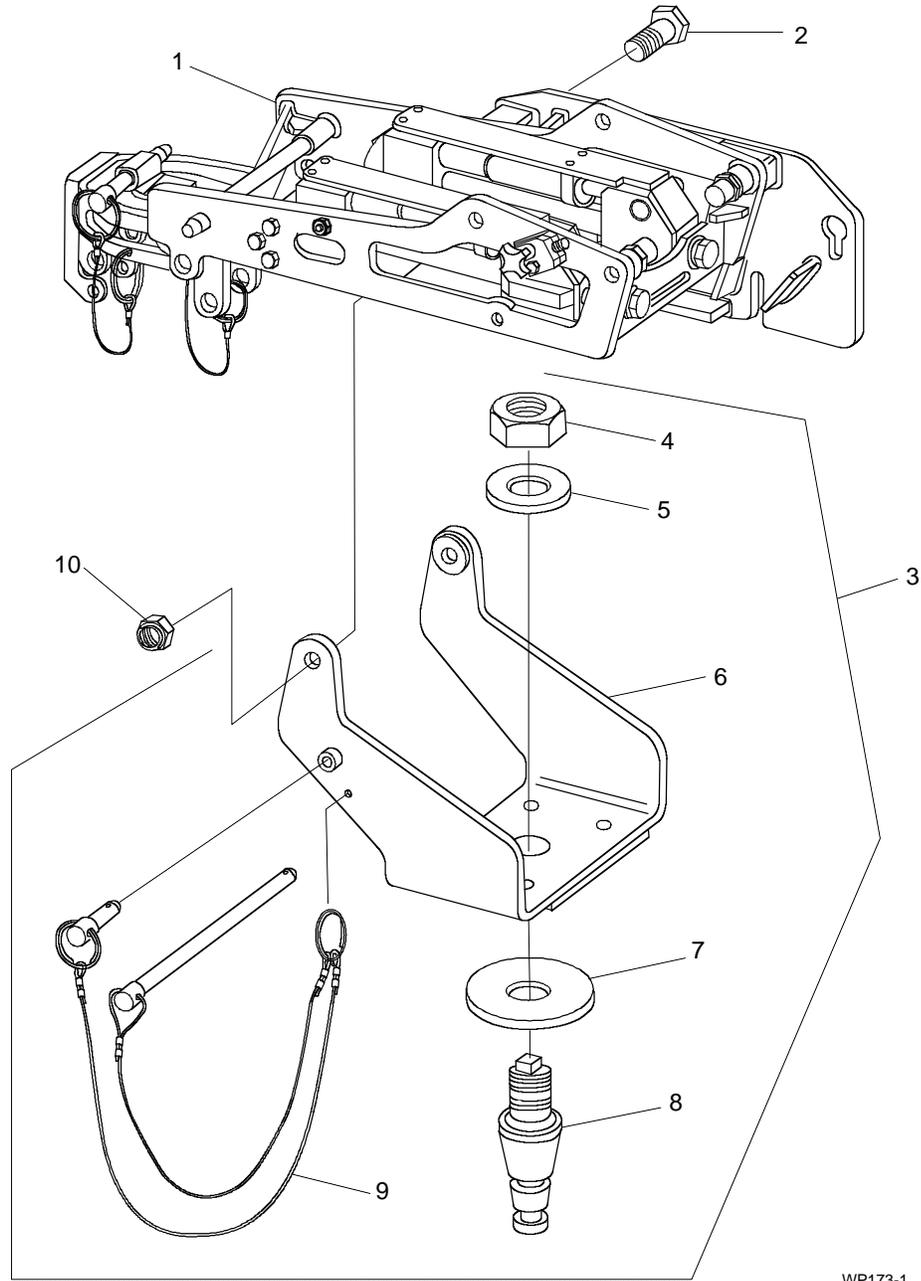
Mount, Machine Gun, MK93 MOD 1, P/N 6650717 and
